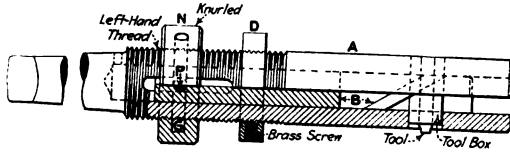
RECESSING BAR FOR DRILLING MACHINE
